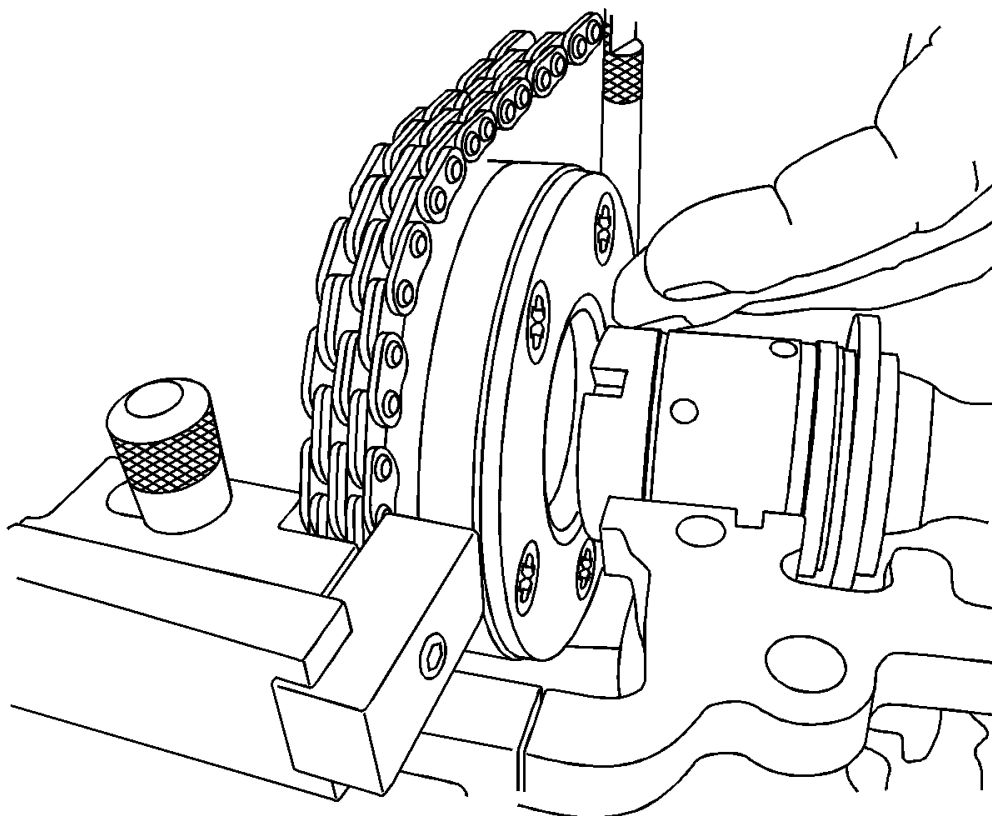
Sliding Camshaft Position Actuator Off End Of Intake Camshaft
